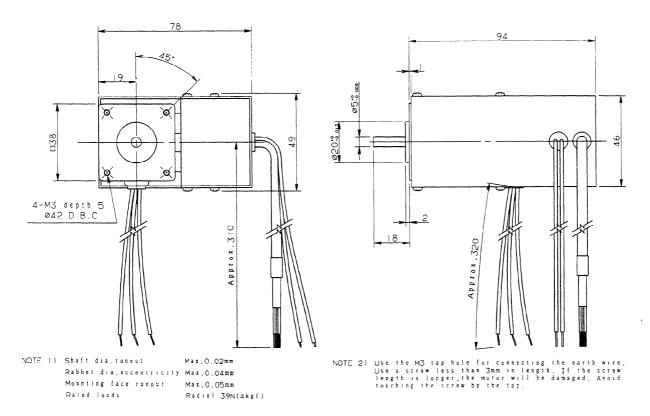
(b) Model 5-0 (with the absolute pulse coder)
